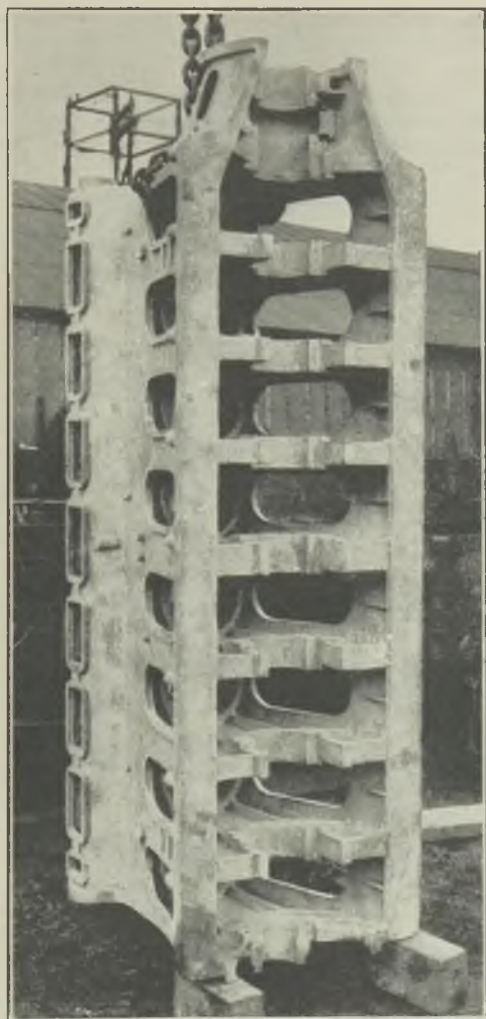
INTERNAL VIEW OF THE DIESEL-
